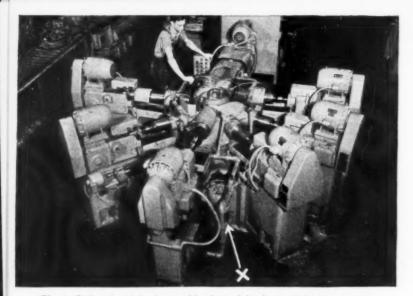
Coolant in wholesale quantities is used in the rough boring operation which marks the start of the machining operation on the accessory drive housing for the V-1710 Allison engine. A chip storage opening located across the unit from the operator is accessible to the chip operators while the machine is in operation. The pump is identified by the "X" in the photograph. Note the panel control board.
